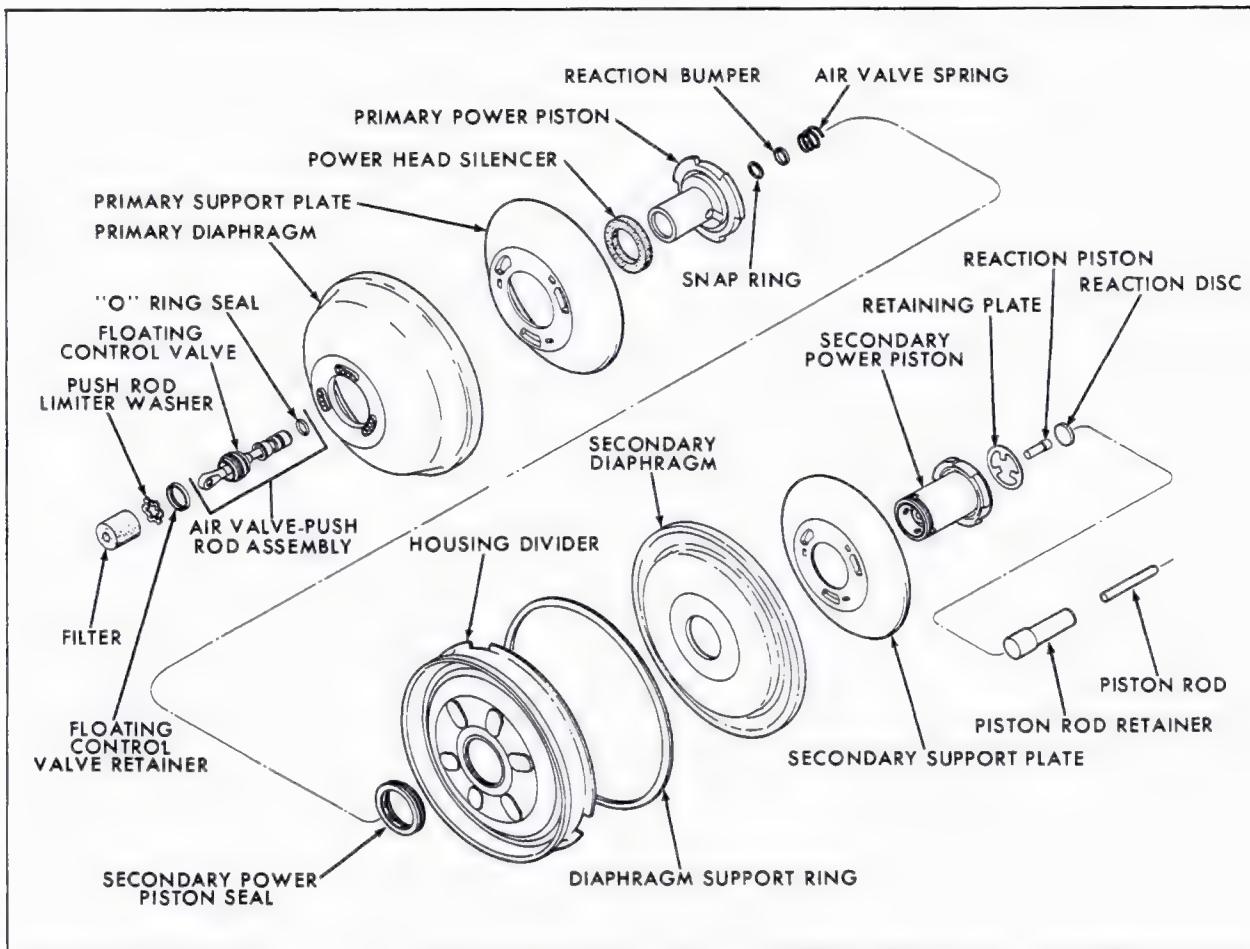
Tandem Diaphragm Power Piston Disassembled
